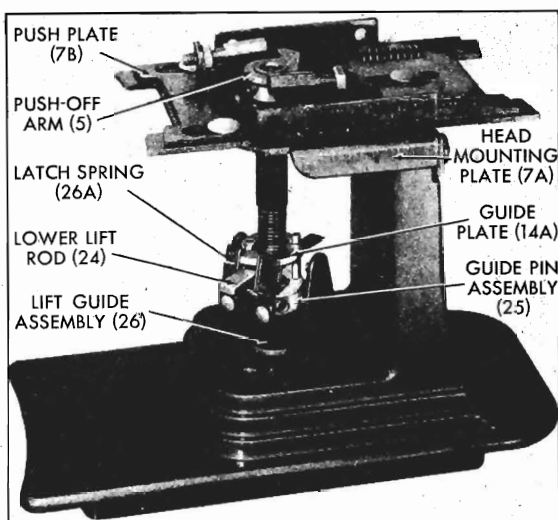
PUSH-OFF ARM, UPPER LIFT ROD, AND GUIDE PIN ASSEMBLY
